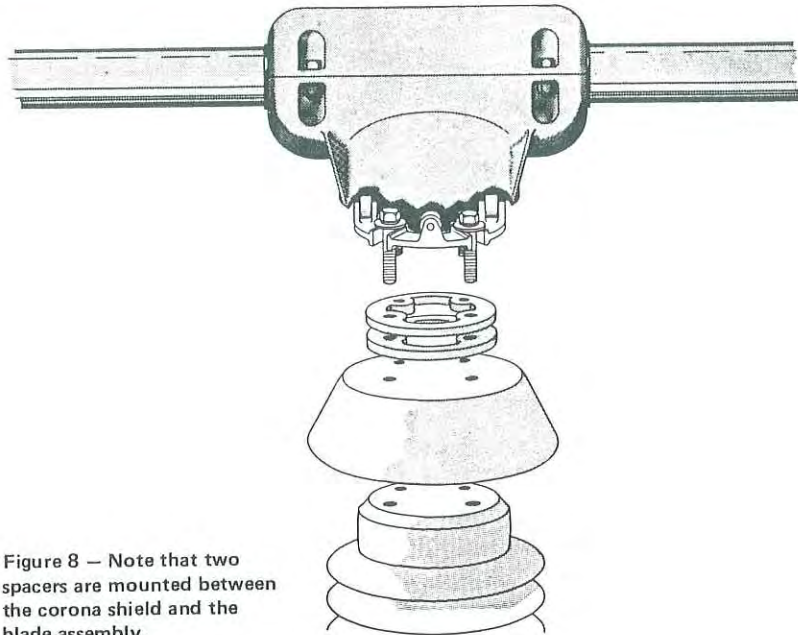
Note that two spacers are mounted between the corona shield and the blade assembly.
